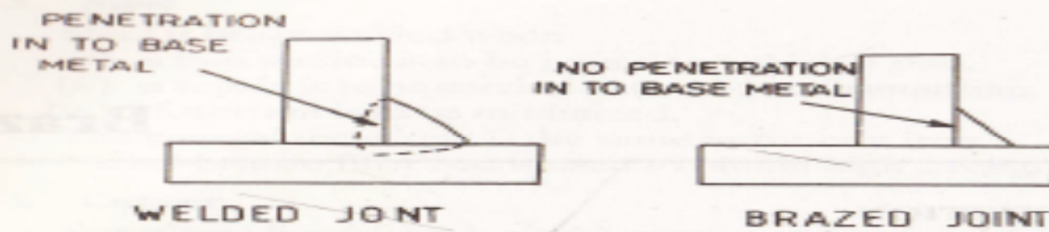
Difference between a welded joint and a brazed joint.
